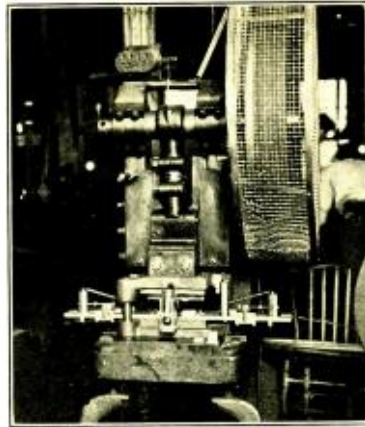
Grid winding machine which winds, welds, cuts, and delivers, ready for use, 8,000 grids per day.
